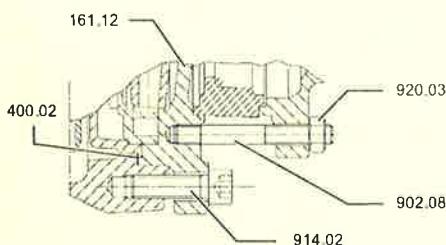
Housing cover version for sizes 2/40-250/01 and 2/50-250/01
